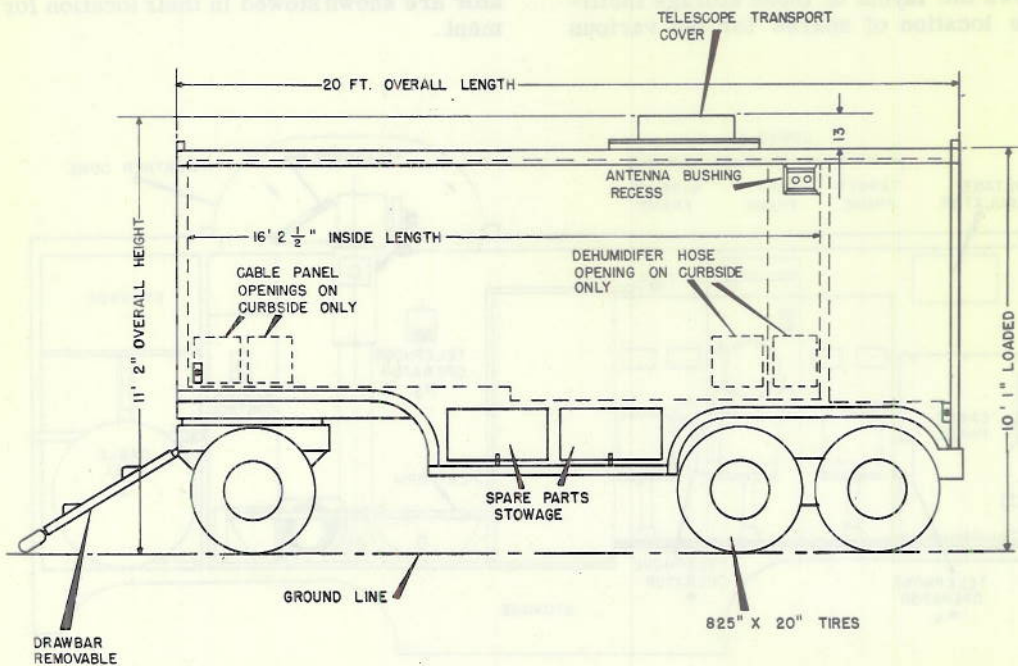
Operations Trailer - Road Side Exterior View - Outline Drawing
